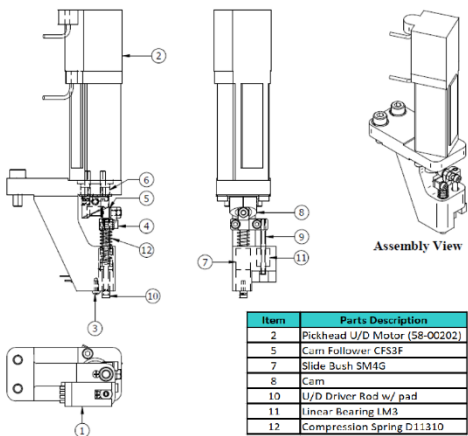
ASM FT-2026 Up/Down Motor Assembly
